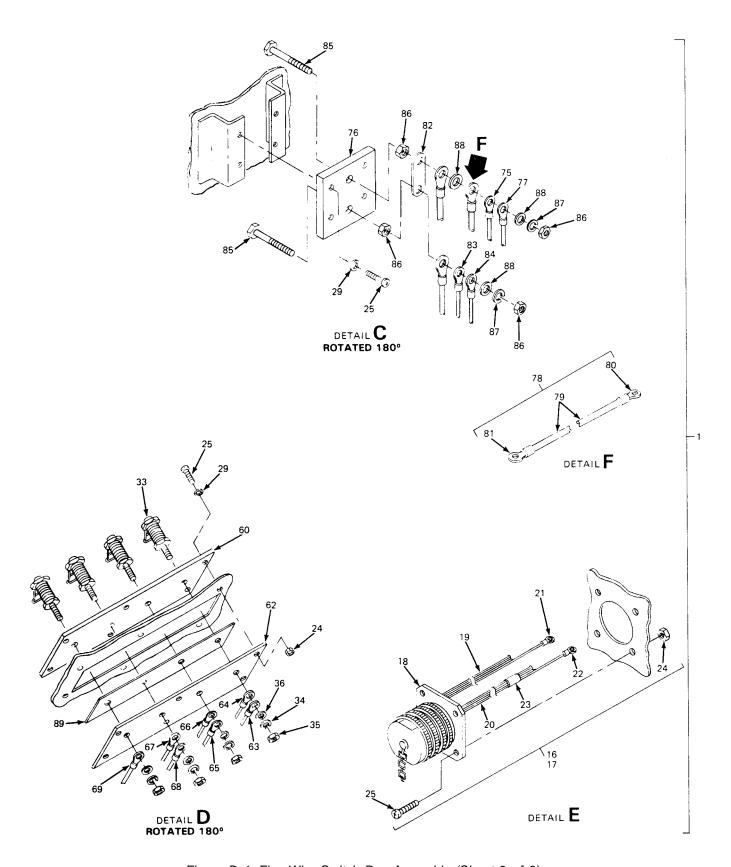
Five-Wire Switch Box Assembly (Sheet 2 of 3).
